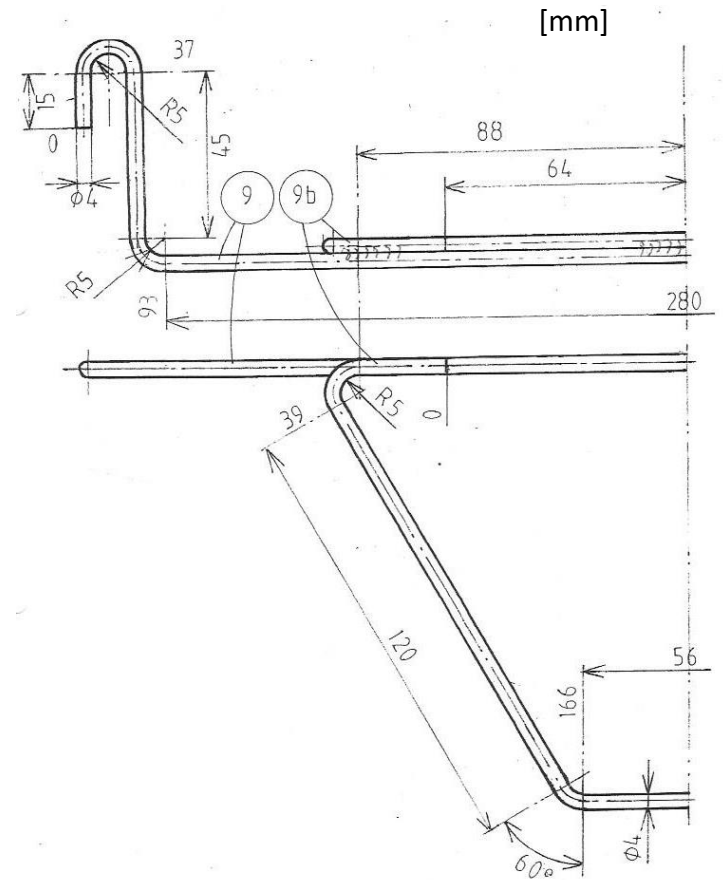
Pot Support (9) and Triangle (9a) welded together
